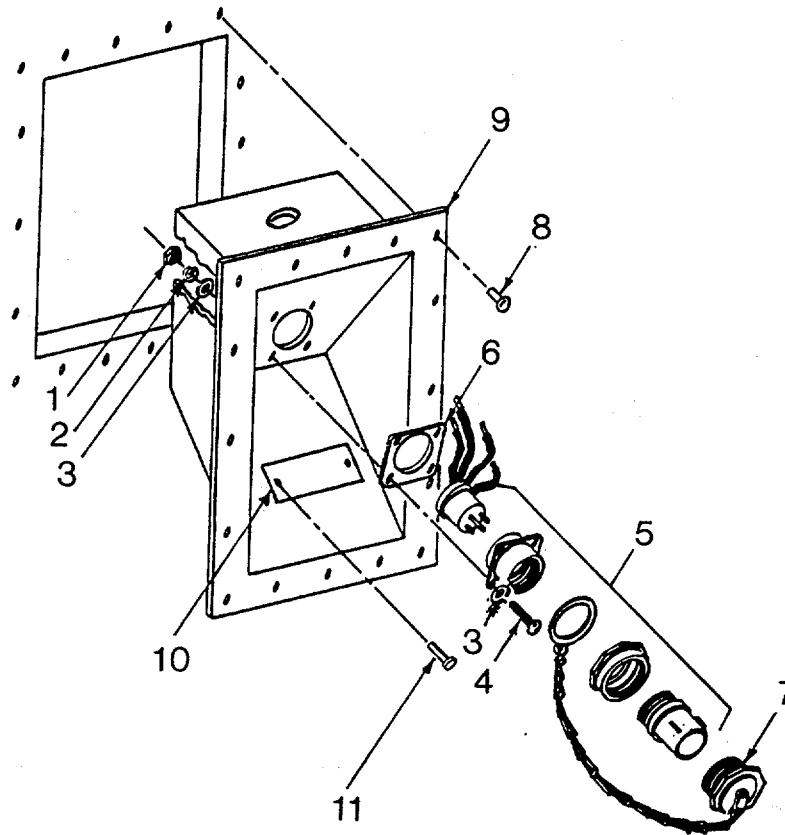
Main Power Cable Receptacle Assembly (Outside Shelter)
